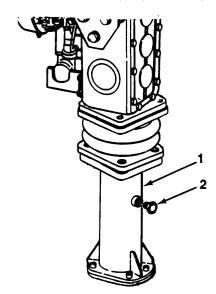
Draining and Filling Lower Unit Oil (VR11).
